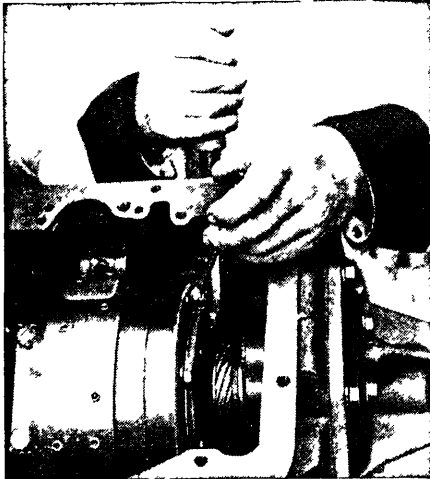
Loosen bolts holding rear bearing retain r t reverse internal gear. Then remove reverse center gear and drive flange attaching bolts
